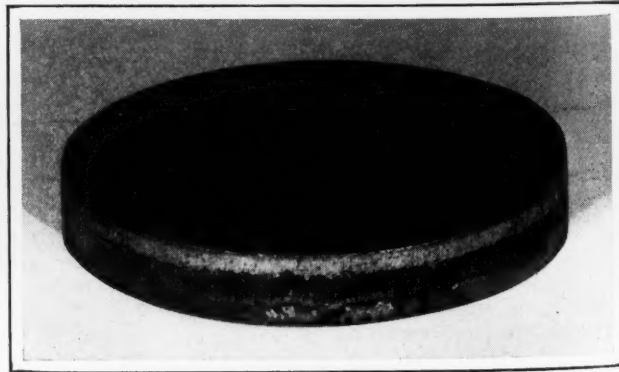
Disk Blanked in Olsen Testing Machine—Another Example of Insufficient Clearance
